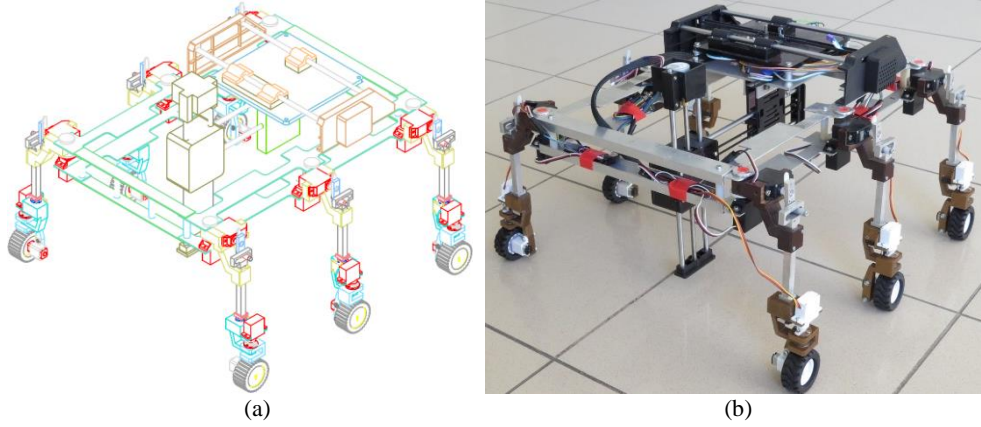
Constructive solution of the mobile manipulator [20]: a) 3D CAD design; b) real prototype.
